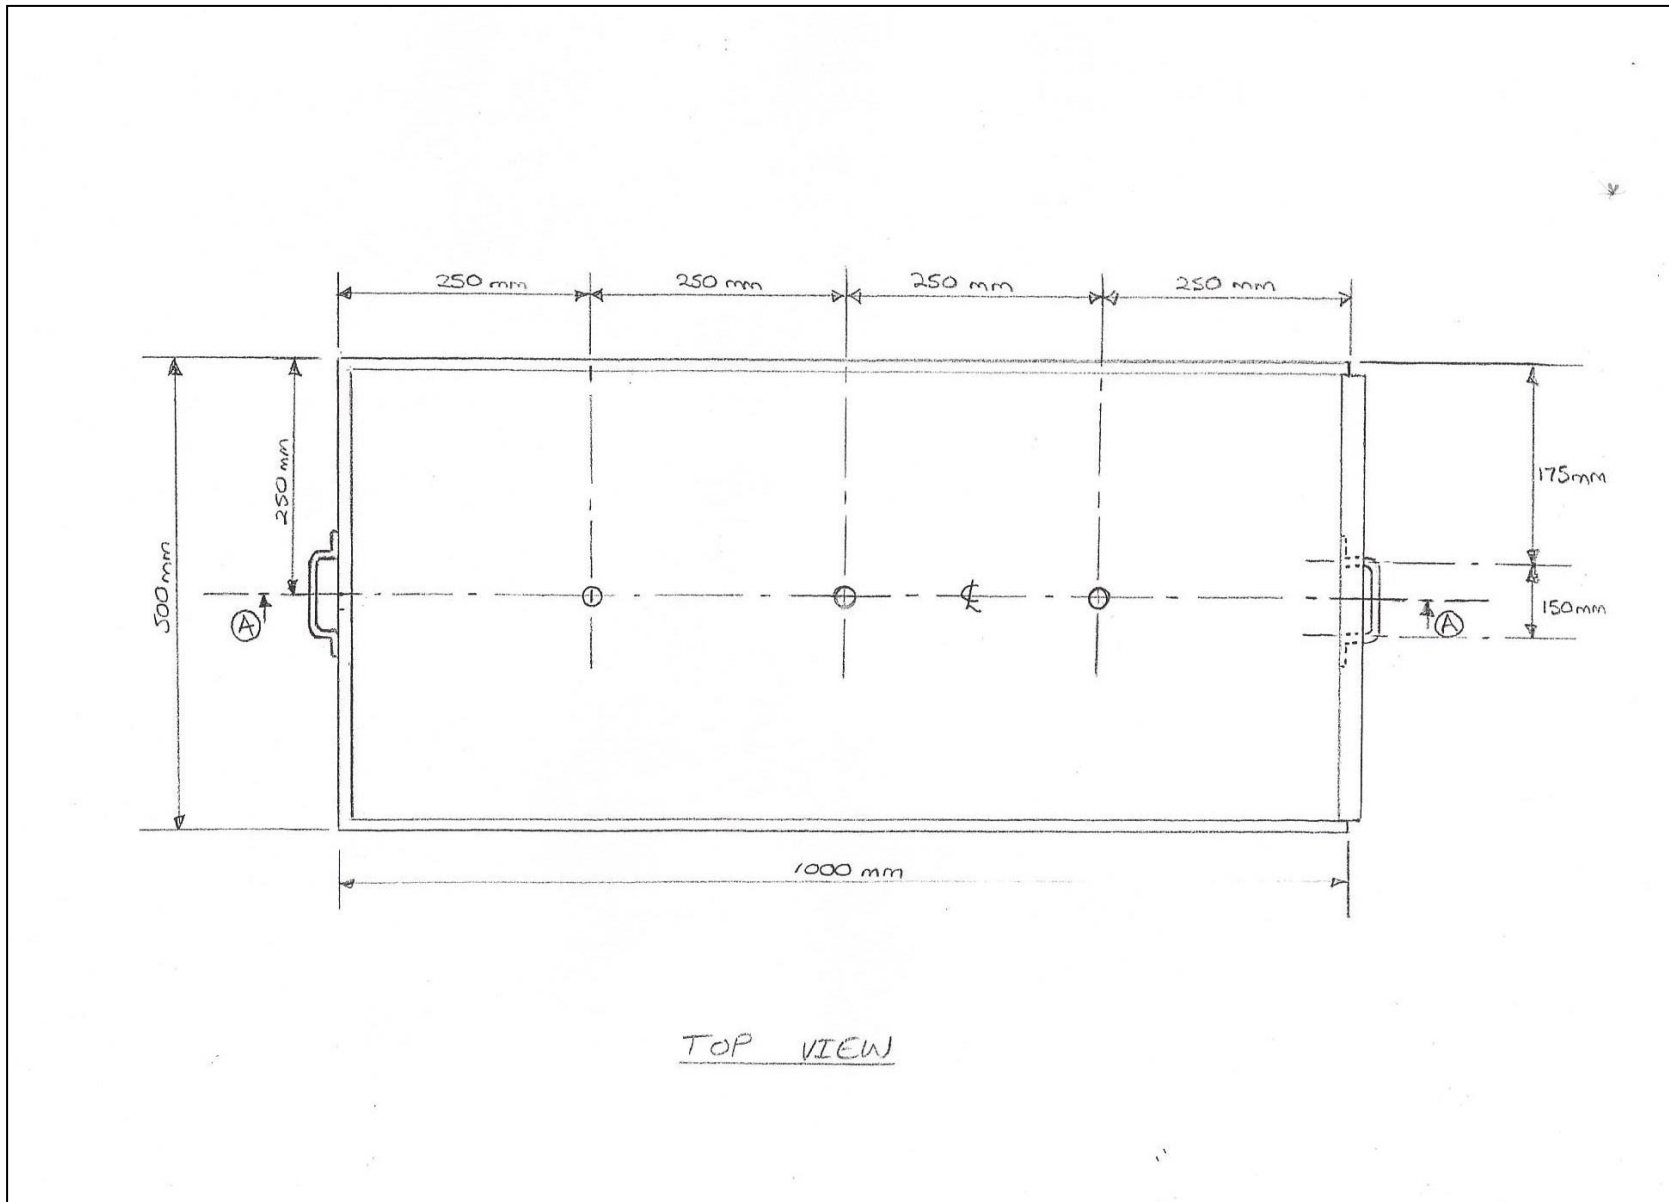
The top view of the Basic Model Apparatus design drawing.
